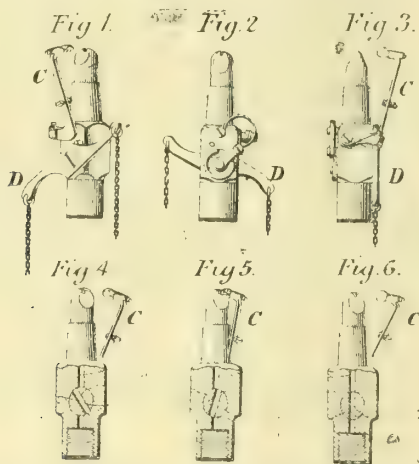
is a perspective elevation of the burner; fig. 2 is a rear view; fig. 3 is a side view; fig. 4 shows the valve and igniting-devices arranged when the gas is cut off; fig. 5 is a similar view when the igniter is in position to light the gas; and fig. 6, when the gas is fully on.
